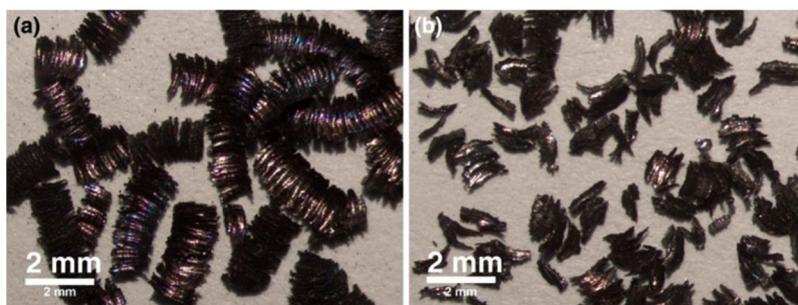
Chips formations; a) using conventional machining, b) using MAM.
